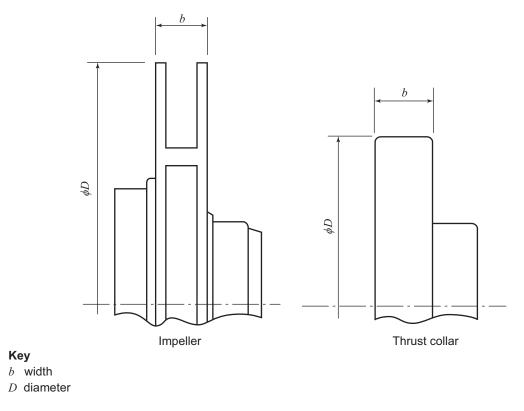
Rotating Component Dimensions to Determine if Single-Plane Balancing is Allowable
